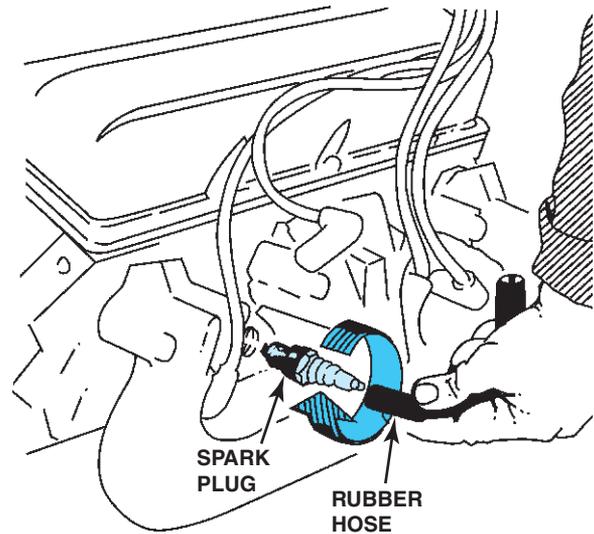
Use a vacuum or fuel line hose over the spark plug to install it without danger of cross-threading the cylinder head.
